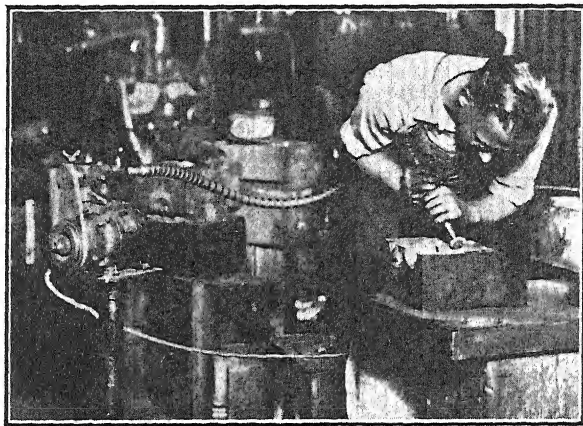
A Buckeye Portable Tool Company "Hercules" No. 364-4 General-Purpose Pneumatic Portable Grinder, Buffer, and Wire Brush Cleaning Tool.
